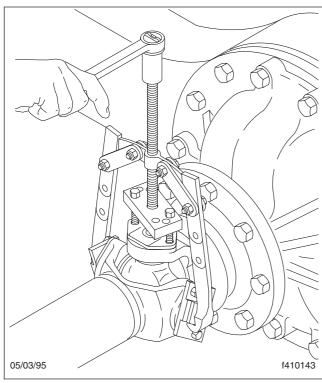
, Remove a Bearing Cup from a Full-Round End-Yoke
